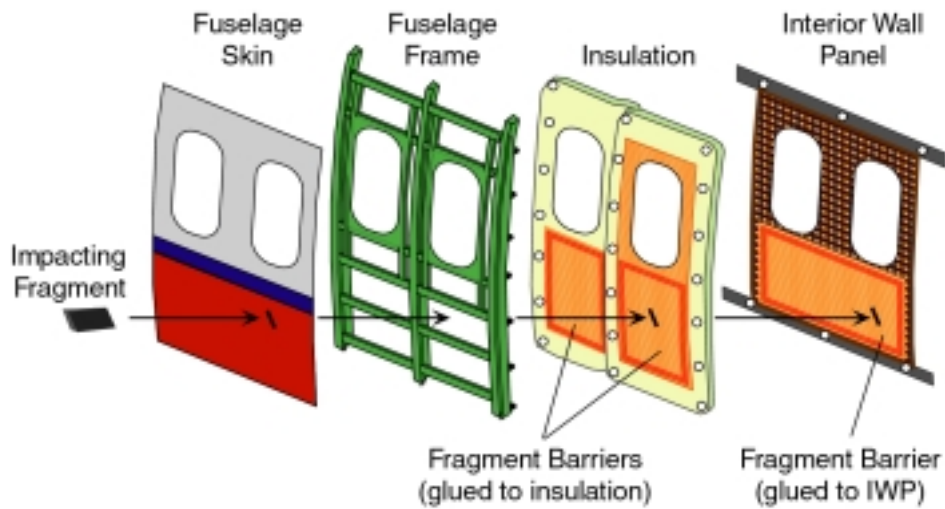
Exploded view of fuselage wall showing location of Zylon fragment barriers.
